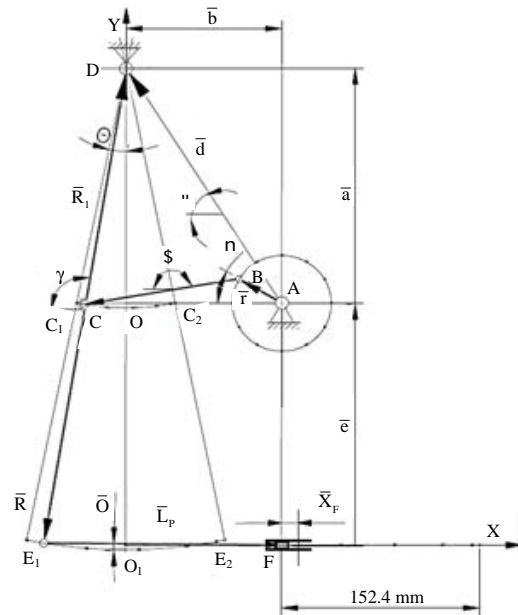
Scheme of the crank-rocker mechanism of driver of cutting mechanism with double blade run
